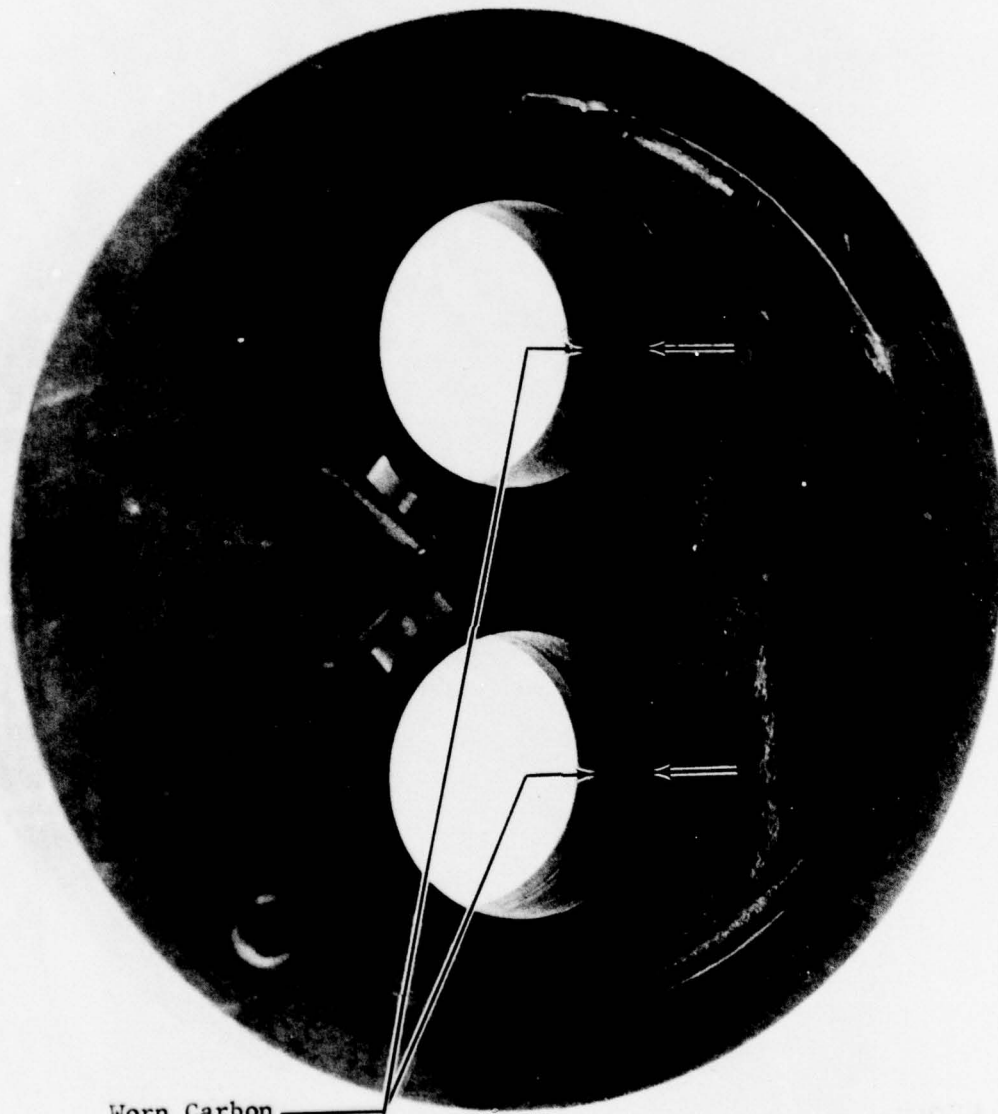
Supply Pump Rear Bearing Assembly Package No. 2
